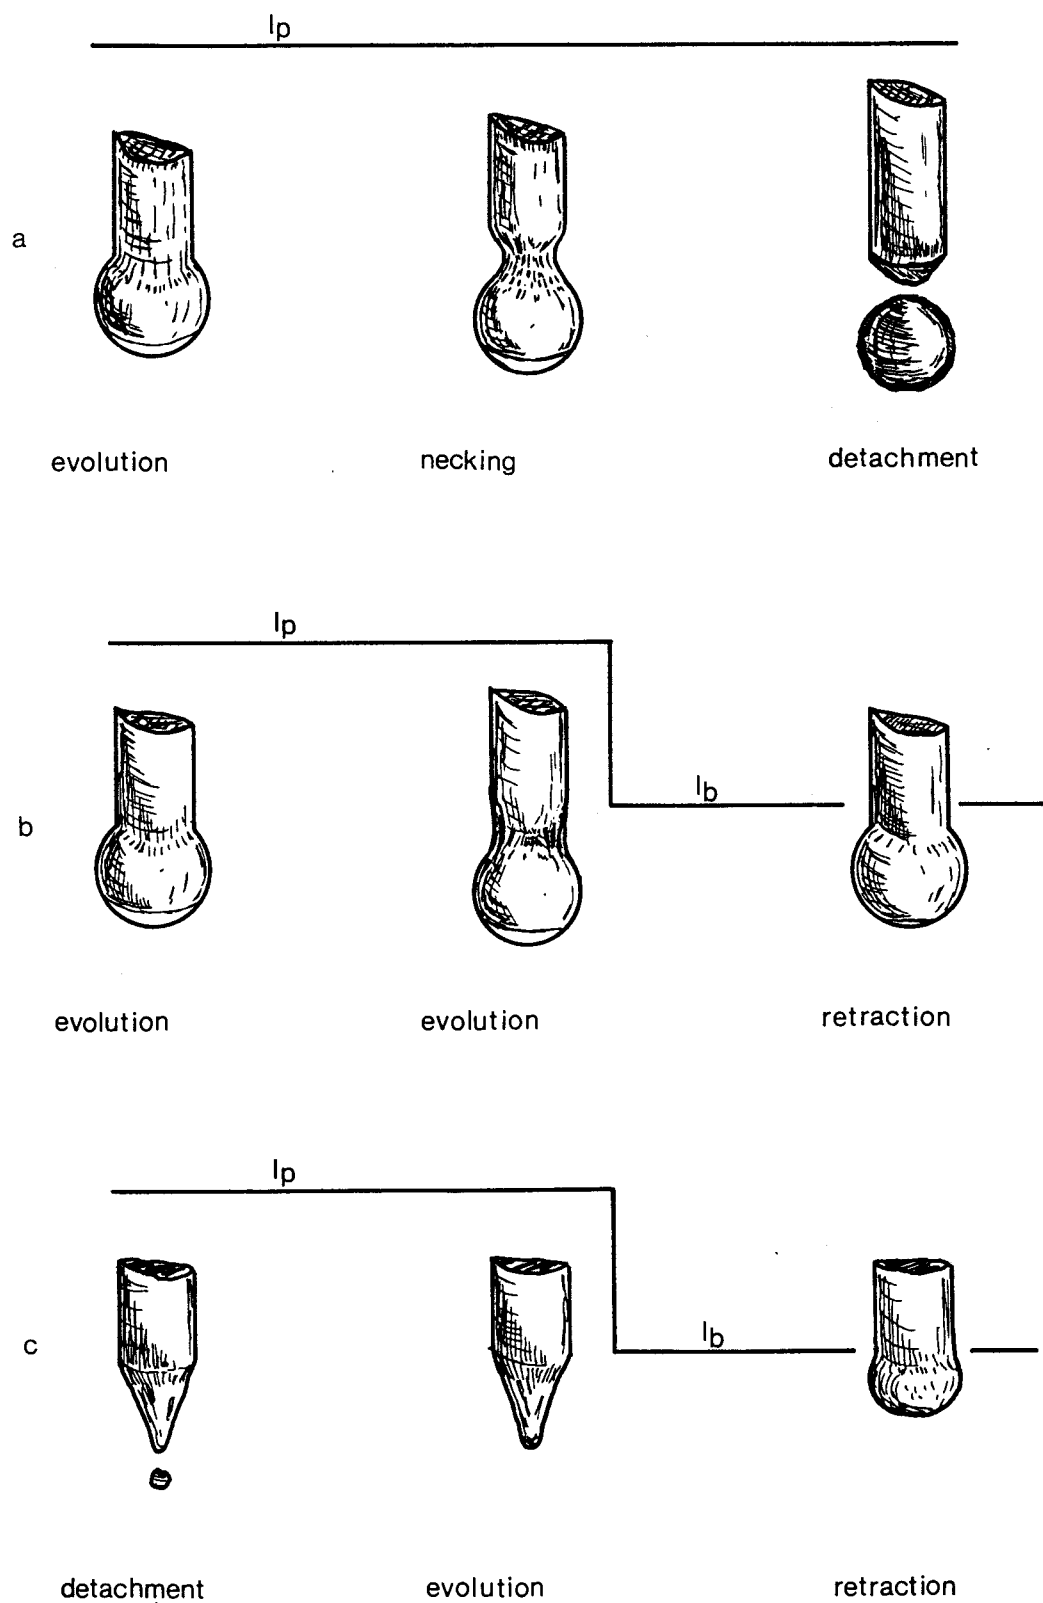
Metal Detachment in Pulsed MIG Welding
